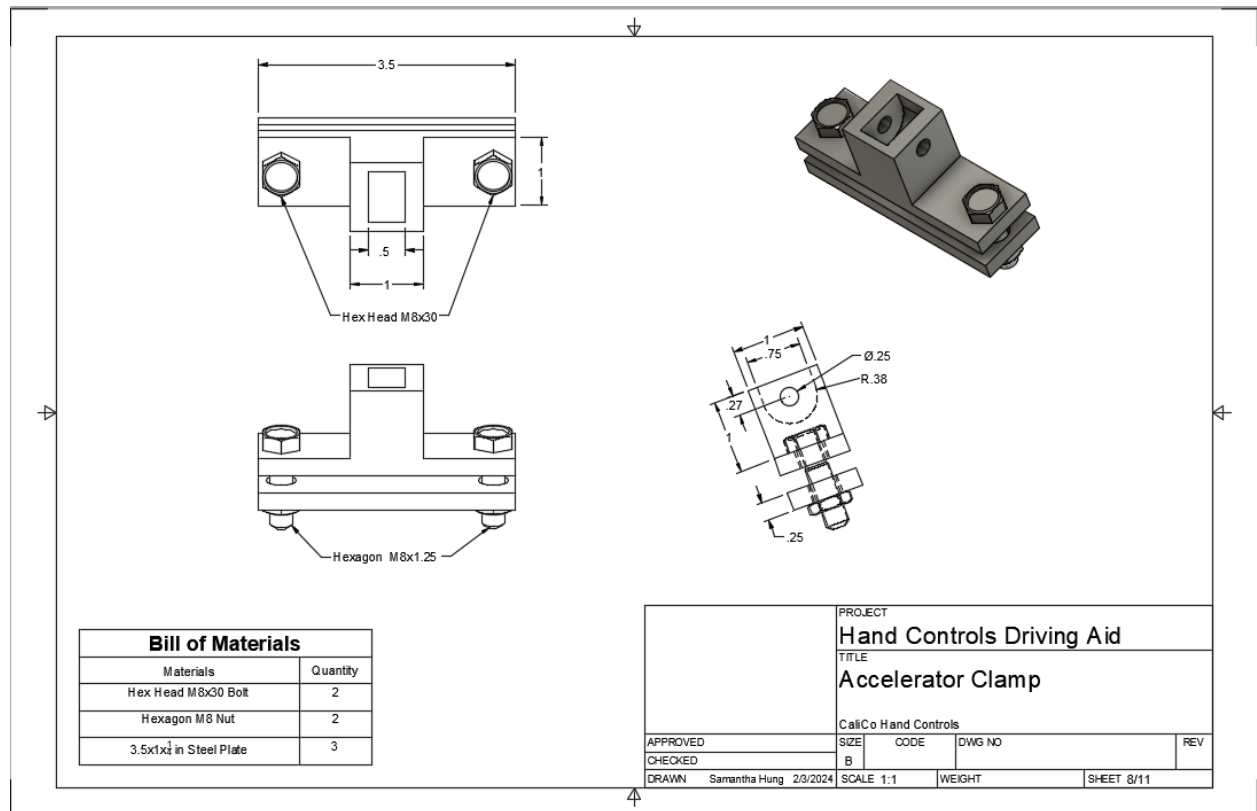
Detailed drawing and isometric view of the accelerator clamp component
